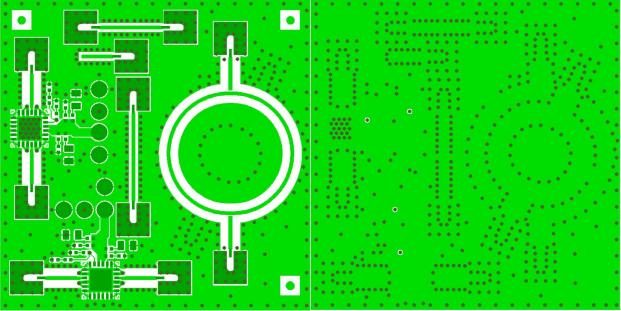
LH Layer 1 board 1; RH Layer 2 board 1
